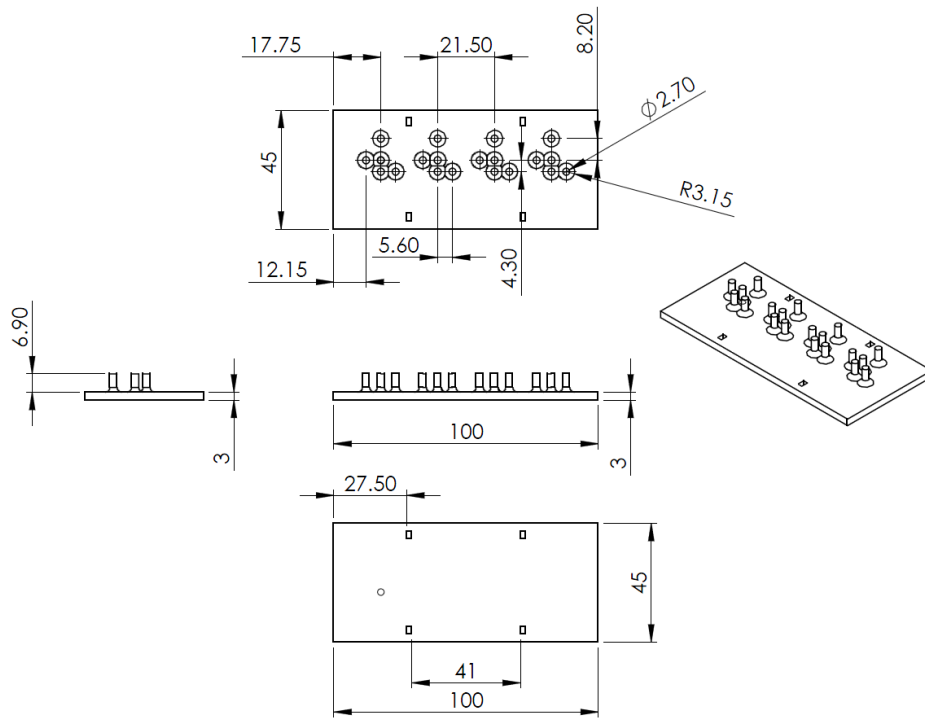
Dimensions [mm] for fabrication tooling (Punch-out unit)
